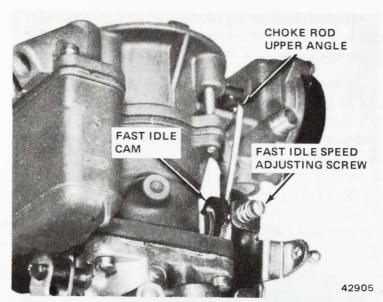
J-55 Fast Idle Cam Linkage Adjustment
